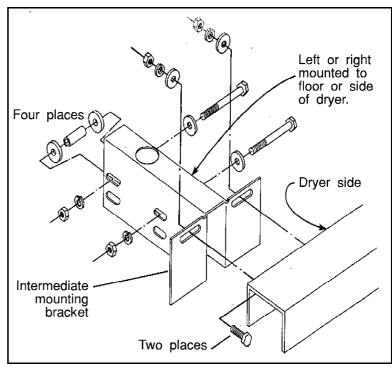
(MSIND417AE) Guide Rail to Support Bracket Connection
